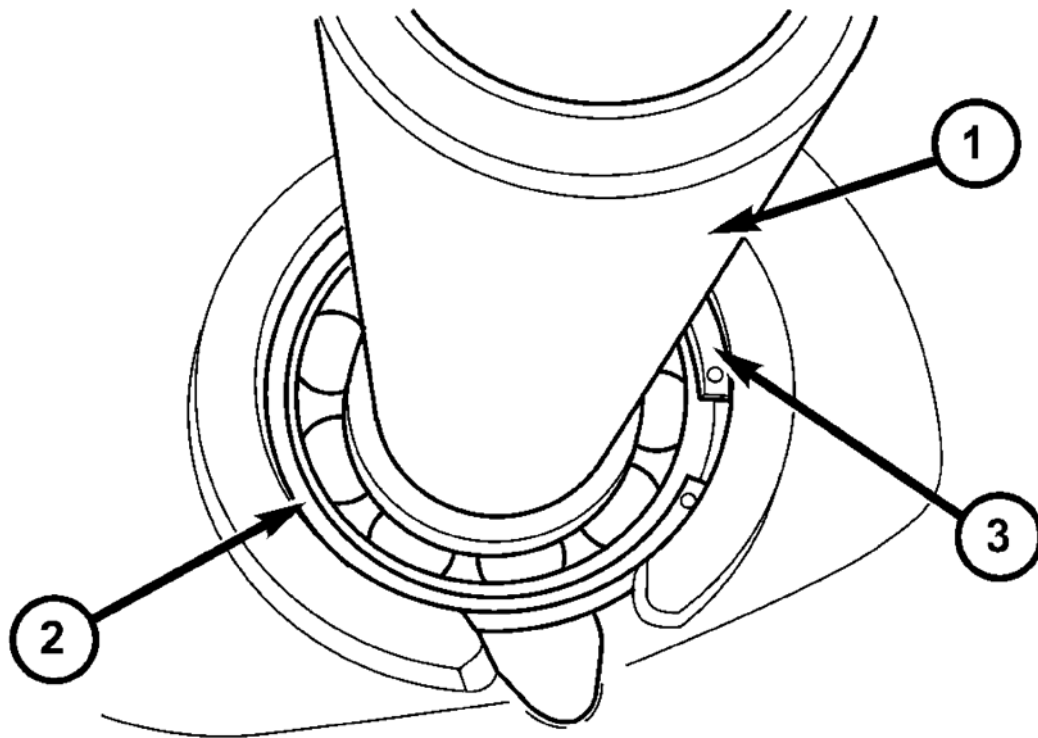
Installing Extension Shaft Bearing Snap Ring Into Extension Housing
